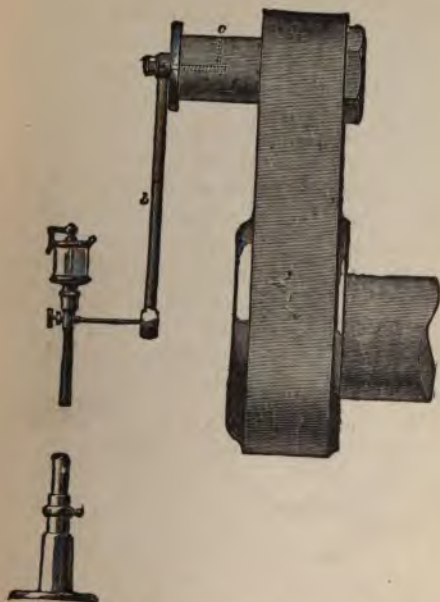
BUCKEYE CENTRIFUGAL CRANK-PIN OILER.
